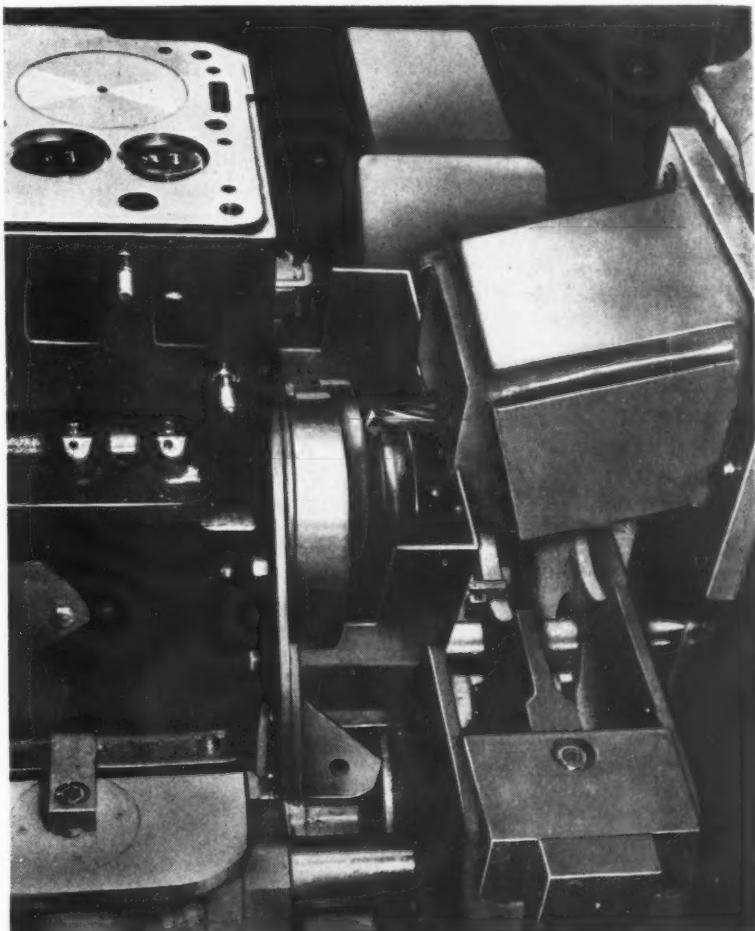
An angularly mounted drill is used to remove metal from damper pulley in automotive engine assembly to correct unbalance
